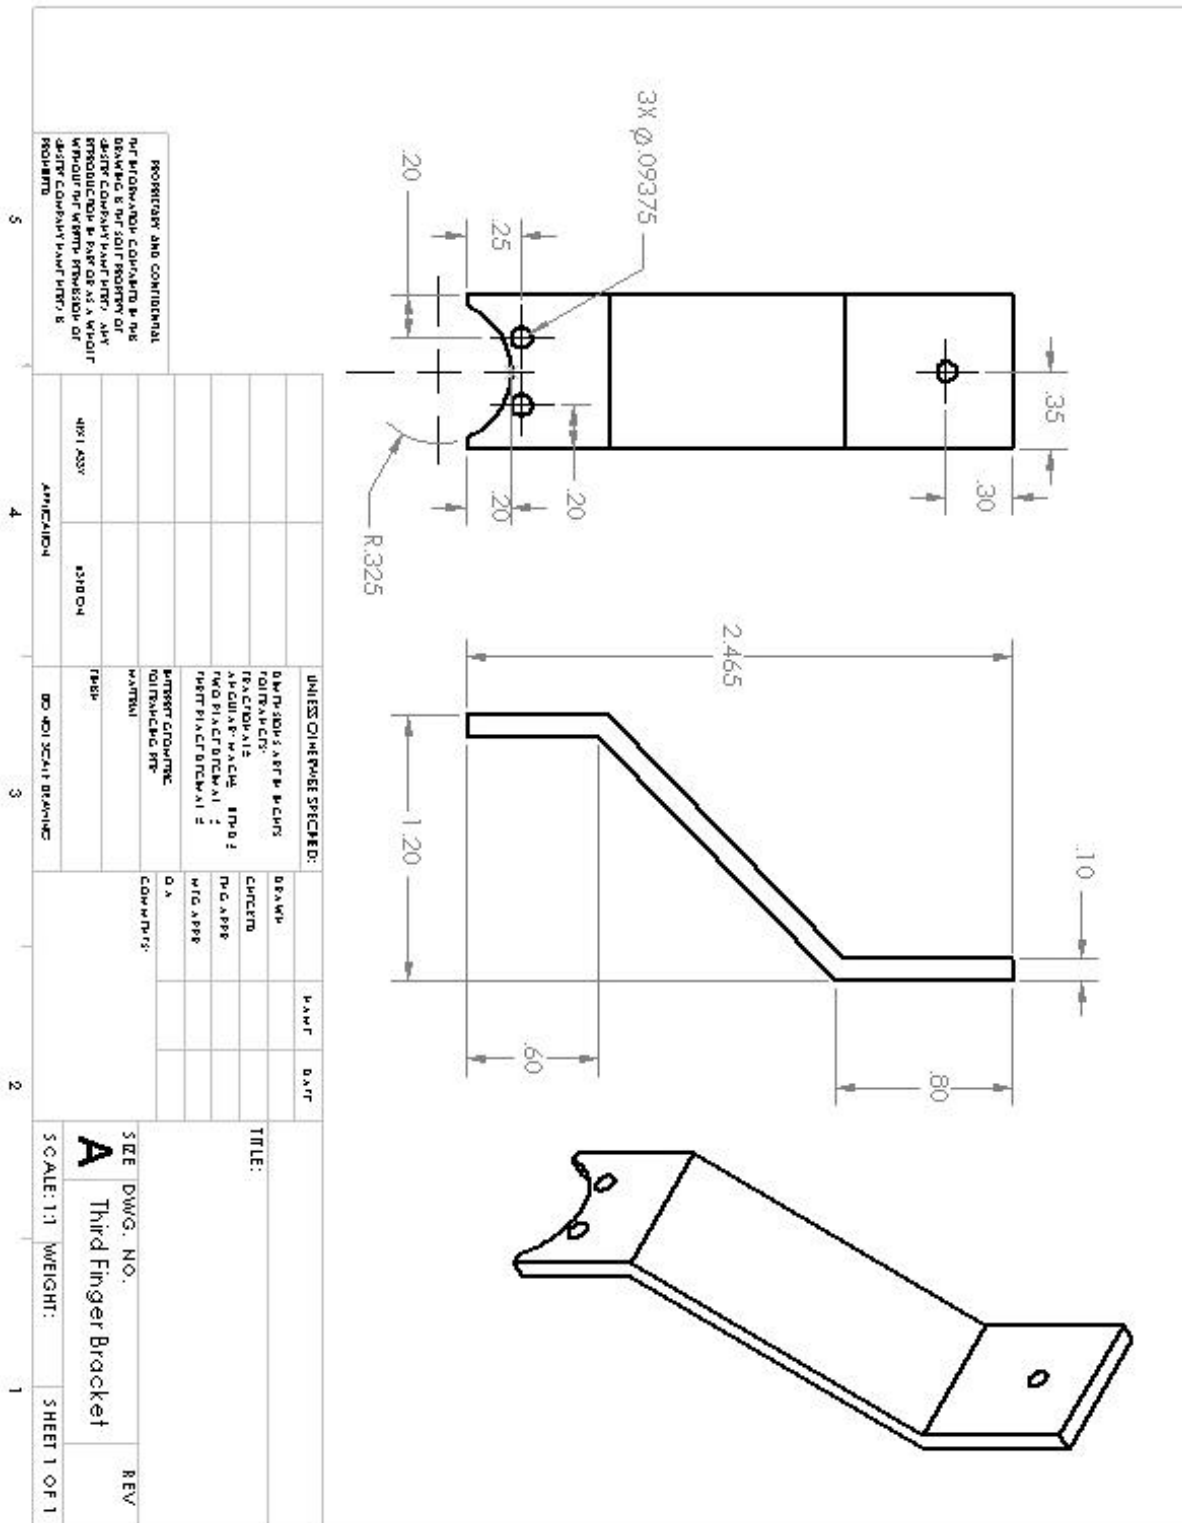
Gripper Pieces used to create the jaw for the gripper assembly.
